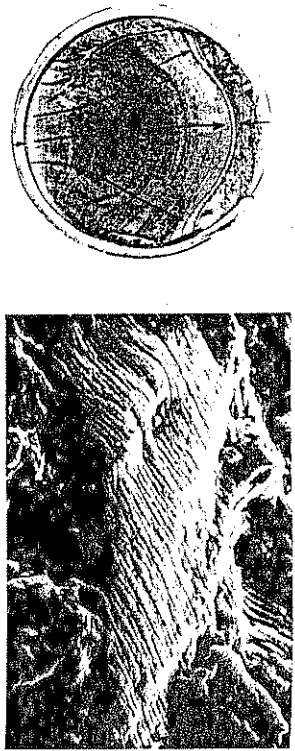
Fatigue fracture surface: (a) at low magnifications, the beach mark pattern indicates fatigue as the fracture mechanism. The arrows show the direction of growth of the crack front, whose origin is at the bottom of the photograph. (b) At very high magnifications, closely spaced striations formed during fatigue are observed ($\times 1000$). (Image (a) is from CA Cortell, *Fatigue Failures with Special Reference to Fracture Characteristics*; Failure Analysis: The British Engine Technical Reports, American Society for Metals, 1981, p. 218)
